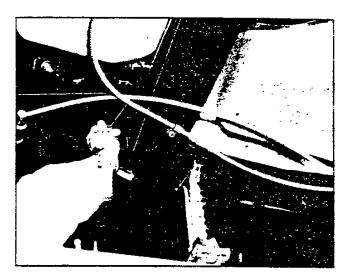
Tee-in Adjustment—Shimming Outboard Gap
